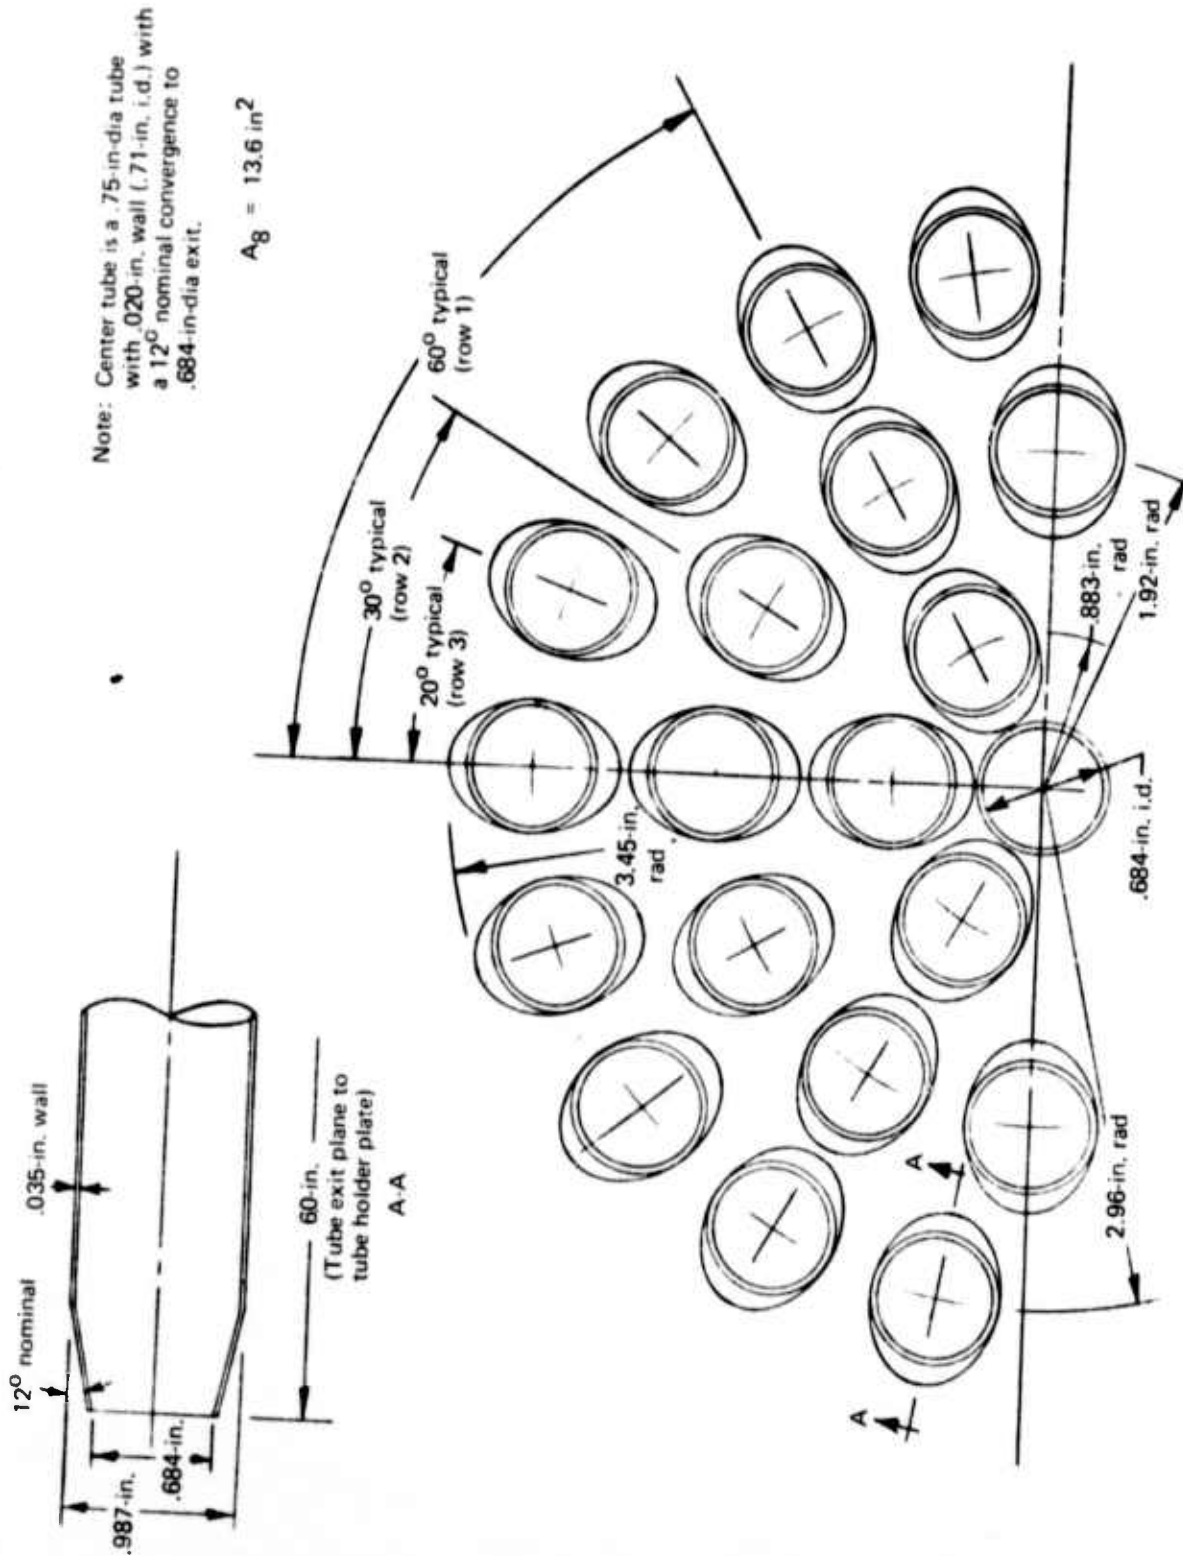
Schematic of 37-Tube, AR 2.75 Elliptical-Tube Close-Array Nozzle
